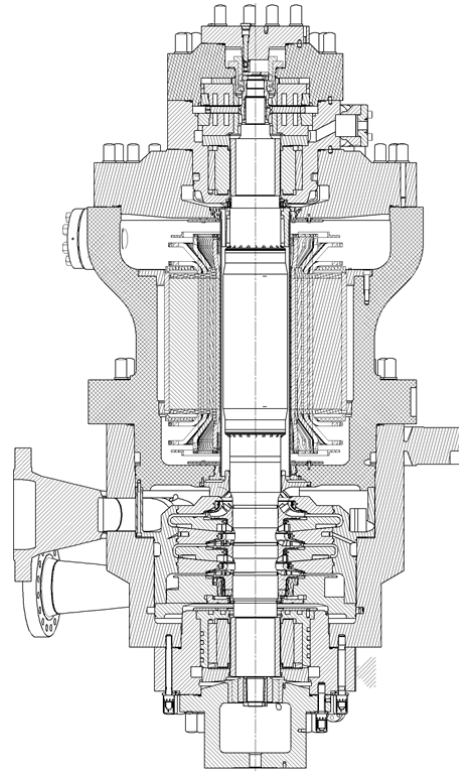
Cross-section of hermetically sealed compressor for Sour and Corrosive gases
